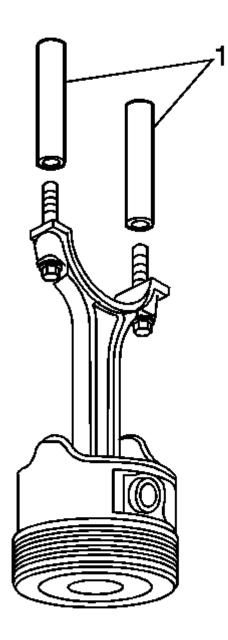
View Of Rubber Fuel Line From Connecting Rod Bolts Courtesy of GENERAL MOTORS CORP.
